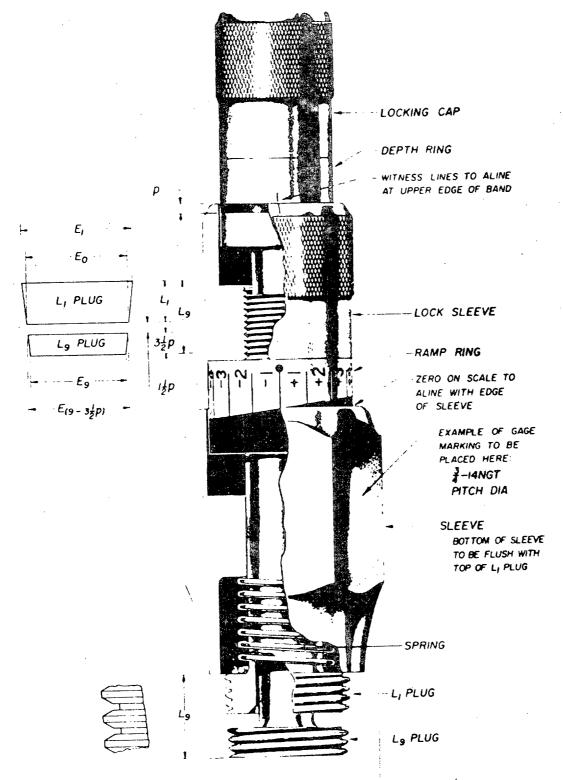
Pitch diameter plug gage; NGT, SGT.
